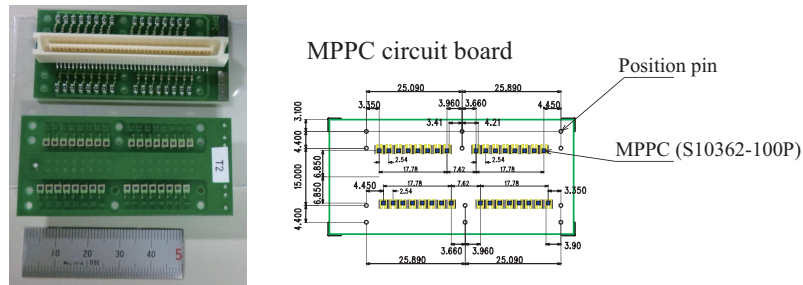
Photograph and drawing of MWPC PCB board. 32 MPPCs are mounted in 2.54 mm pitch. This MPPC PCB is fixed on the detector frame at the fiber readout edge with the position pin.
